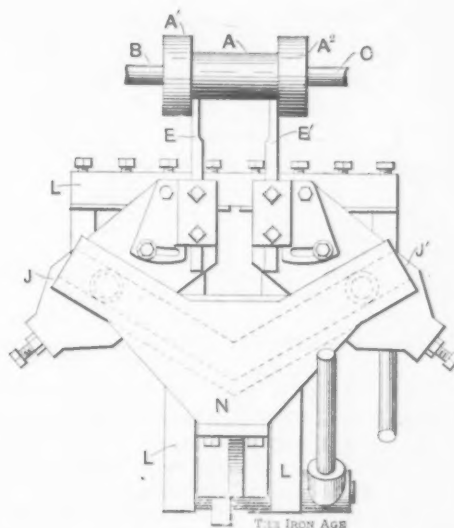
Enlarged Plan of Mechanism for Finishing the Inner Beveled Faces of the Spool Flanges.
